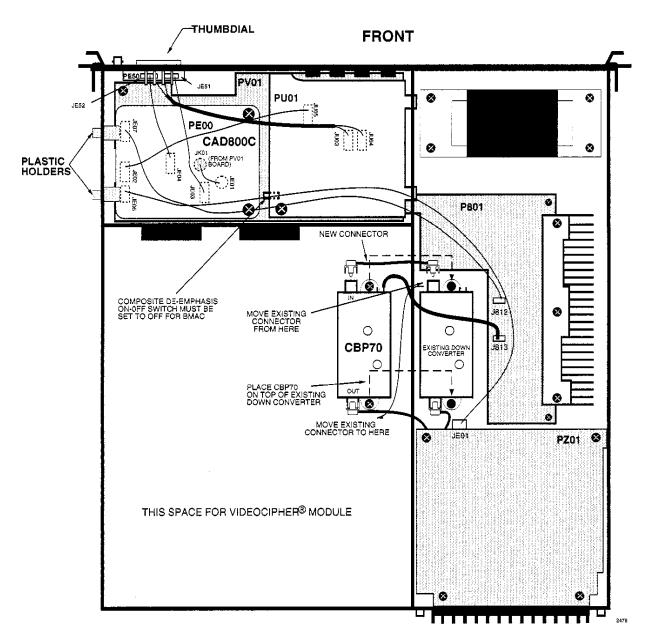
AGILE IRD-I Top View (Cover Removed)
